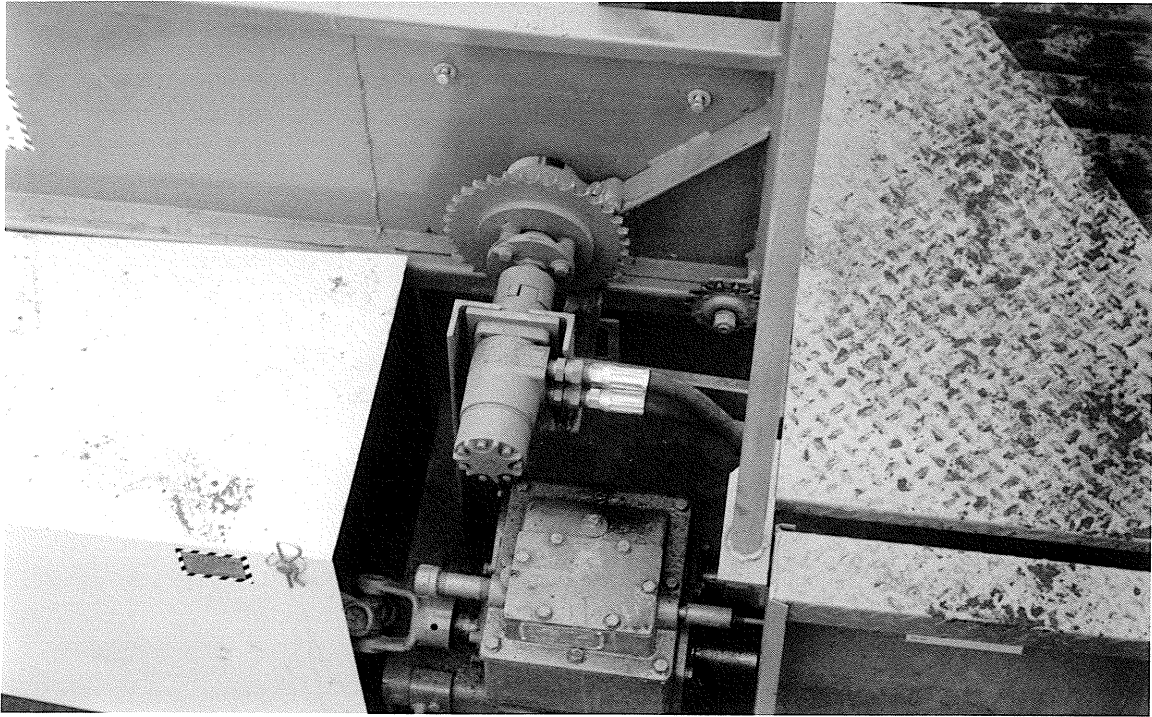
View of Mount for Hydraulic Motor to Drive Rear Cross Conveyor and Side Elevator.
